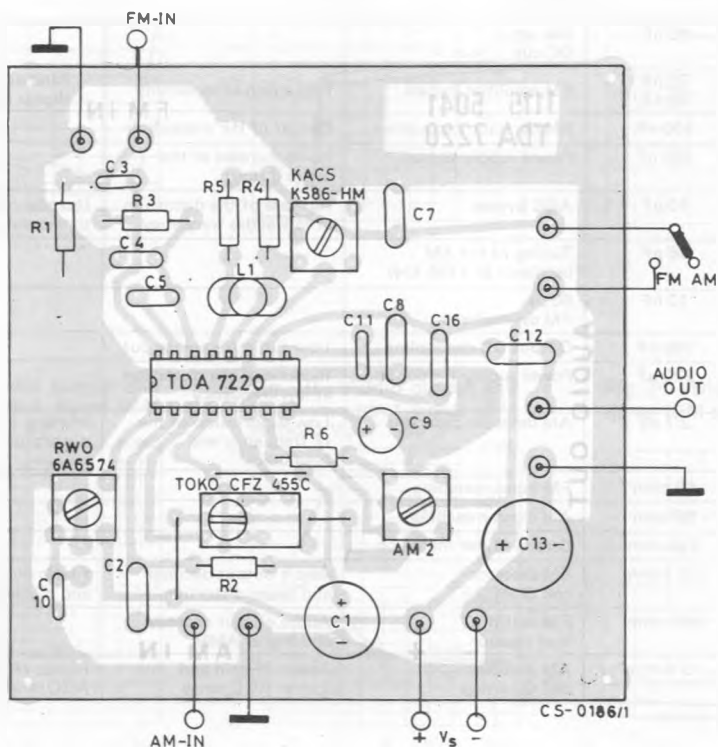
PC board and component layout (1:1 scale) of the test circuit
